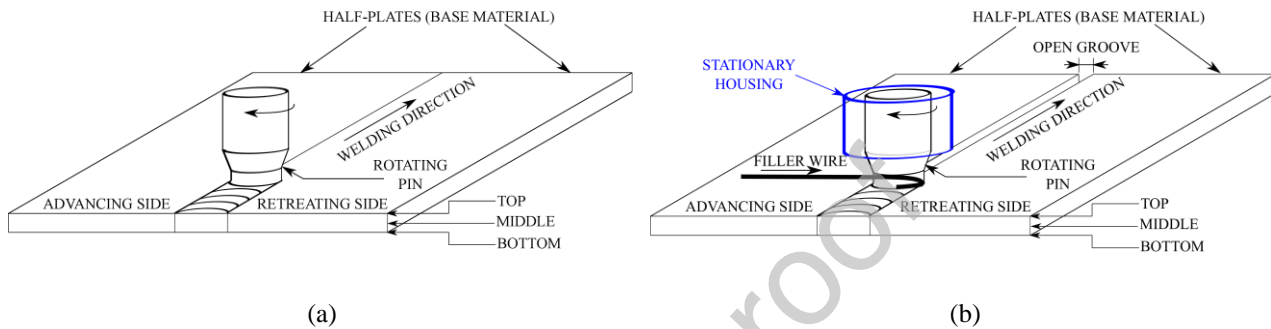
Schemes of the welding processes. (a) Friction stir welding. (b) Hybrid metal and extrusion bonding, which relies on a continuous extrusions and injection of a filler wire into the open groove to consolidate the weld.
